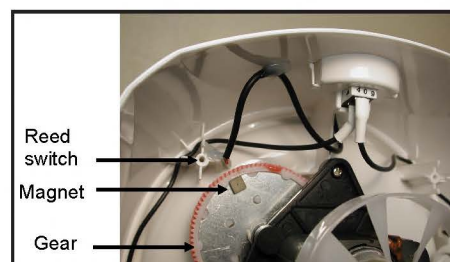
(left) Reed switch, magnet, and gear assembly.
